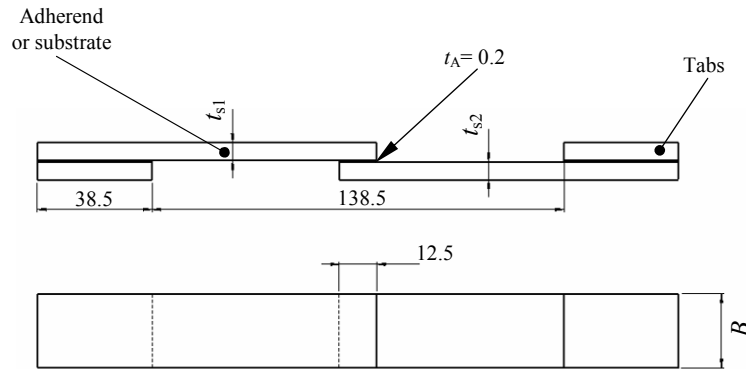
Single-lap joint geometry (dimensions in mm).
